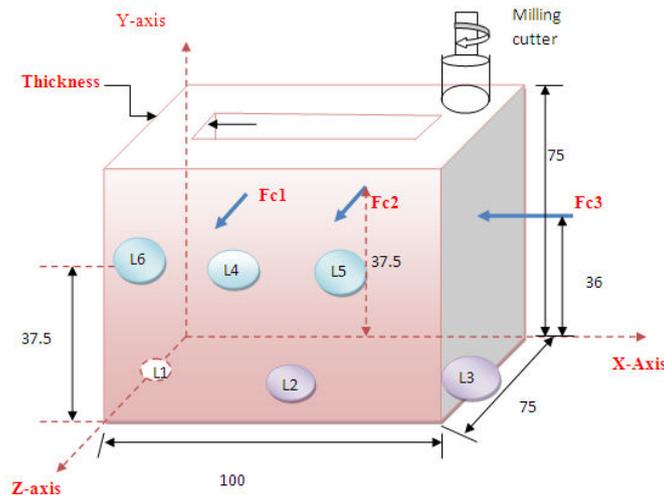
3-2-1 principle W/P fixture system for End milling operation with three clamping force
